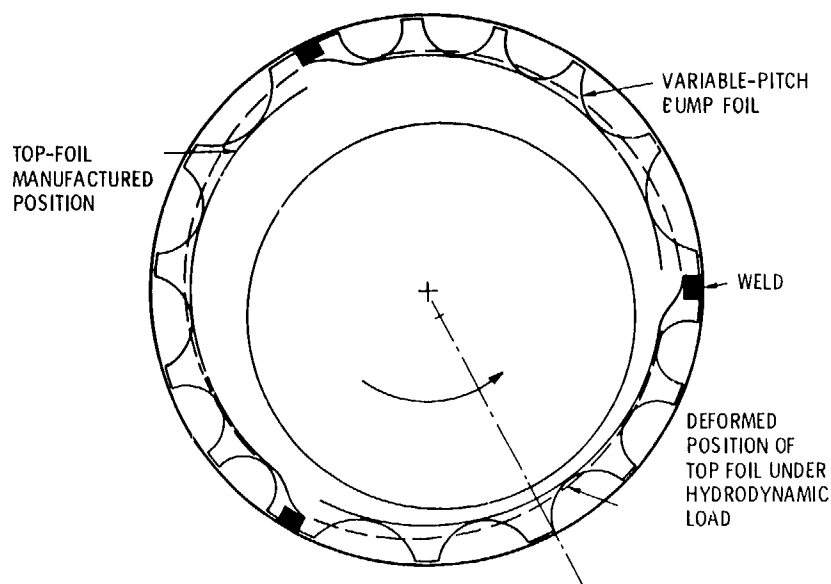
A three sector bump foil journal bearing with variable pitch bump foils. (Mechanical Technology, Inc.)
